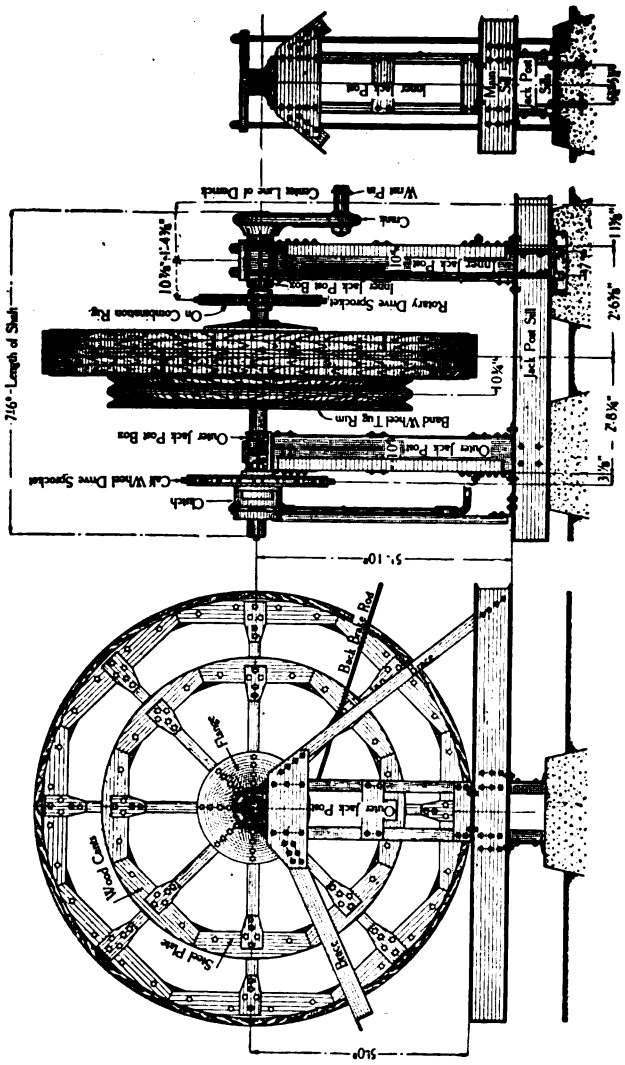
Carnegie Steel Band Wheel, showing diagram of the Band Wheel with Shaft, Crank, Flanges and Sprocket Wheels mounted in Jack Post Boxes secured with Bridle Irons. These Steel Wheels are fitted with wood cants for tug and friction.
